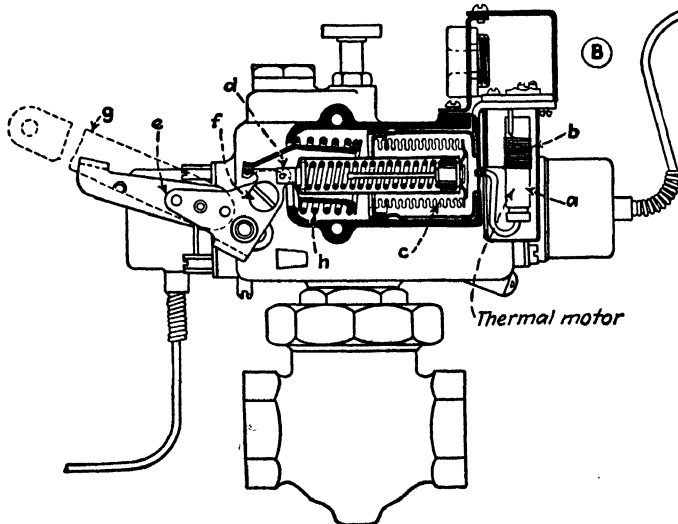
B.—Side view of Fig. 7-12A showing thermostat-controlled heater (thermal motor) on sensitive element.
